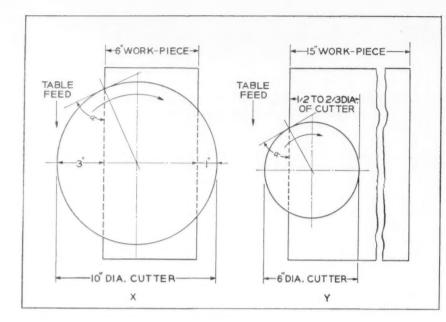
Relative position of the cutter and work-piece, and also the direction of rotation and feed are important. The entrance angle of the blades should be held between 30 and 90 degrees.
